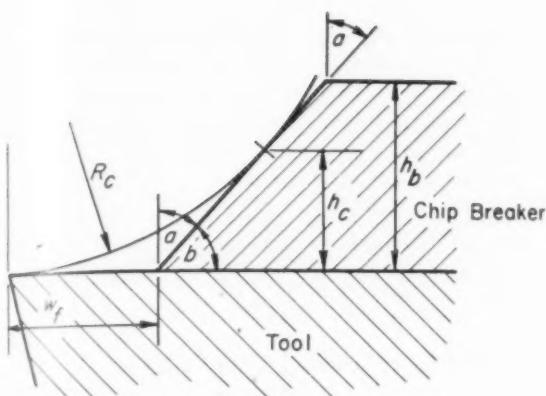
(above) Principal dimensions of the clamped chip breaker.
